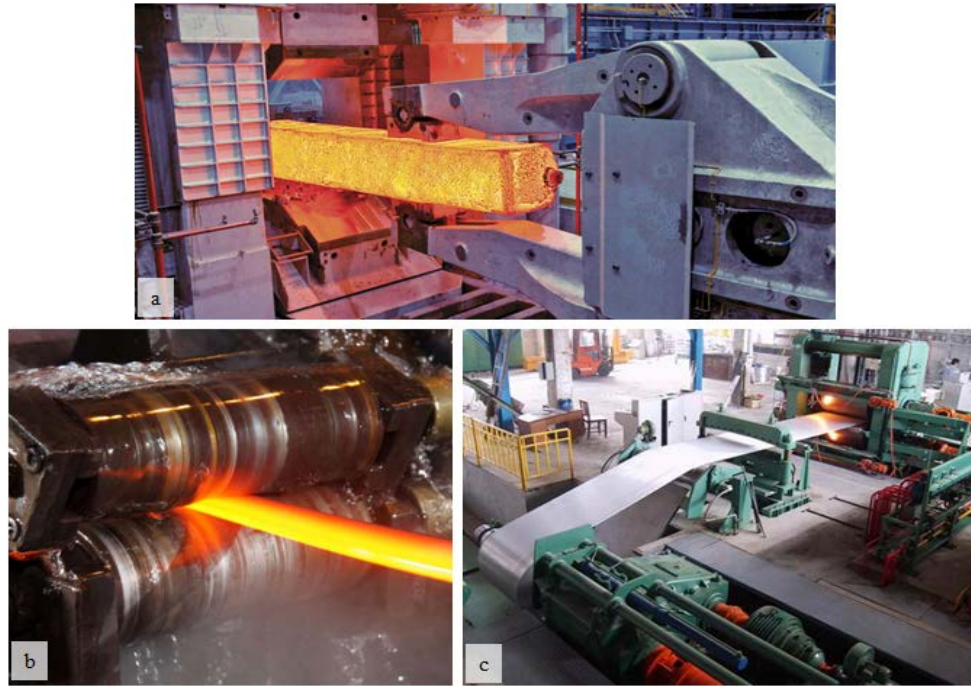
(a) Forging process [35]; (b) billet in hot rolling process [37]; (c) cold-rolling process [42].
